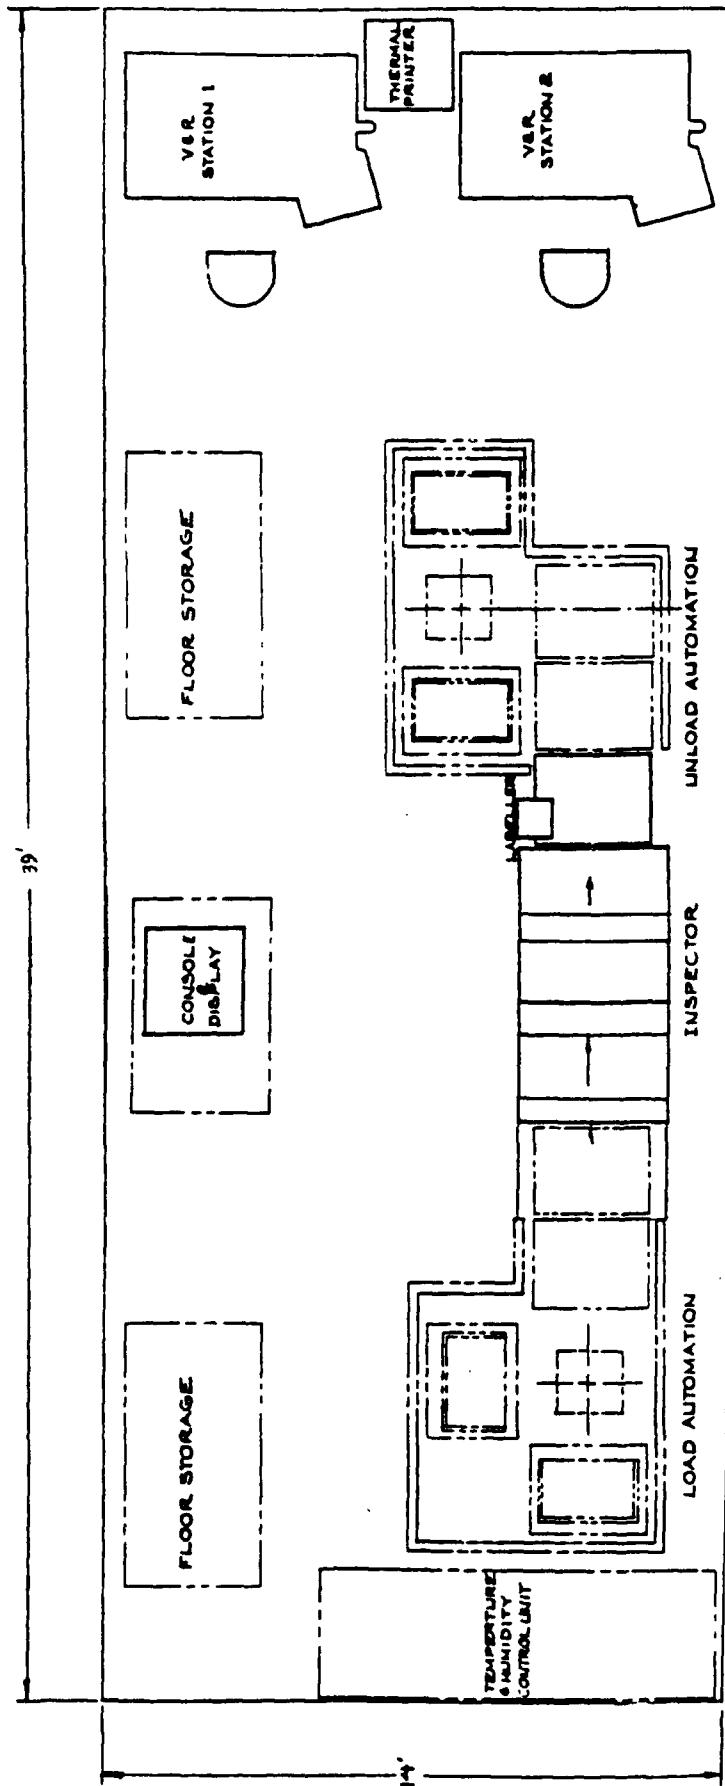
PWB AUTOMATIC INSPECTION MACHINE
